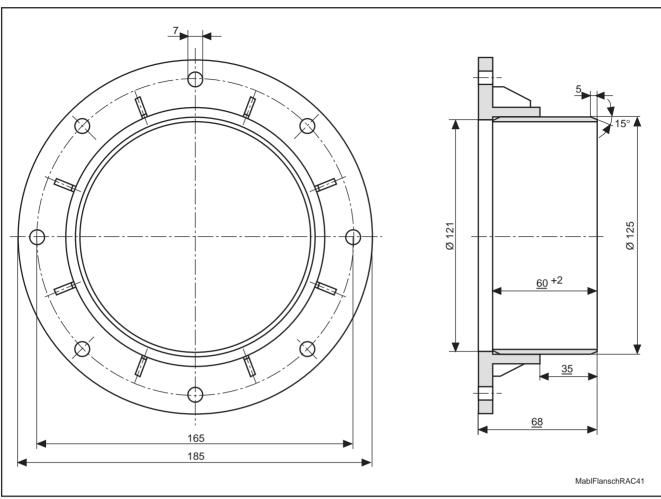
Flange II Dimensions Sheet for Cooling with a Hose.
